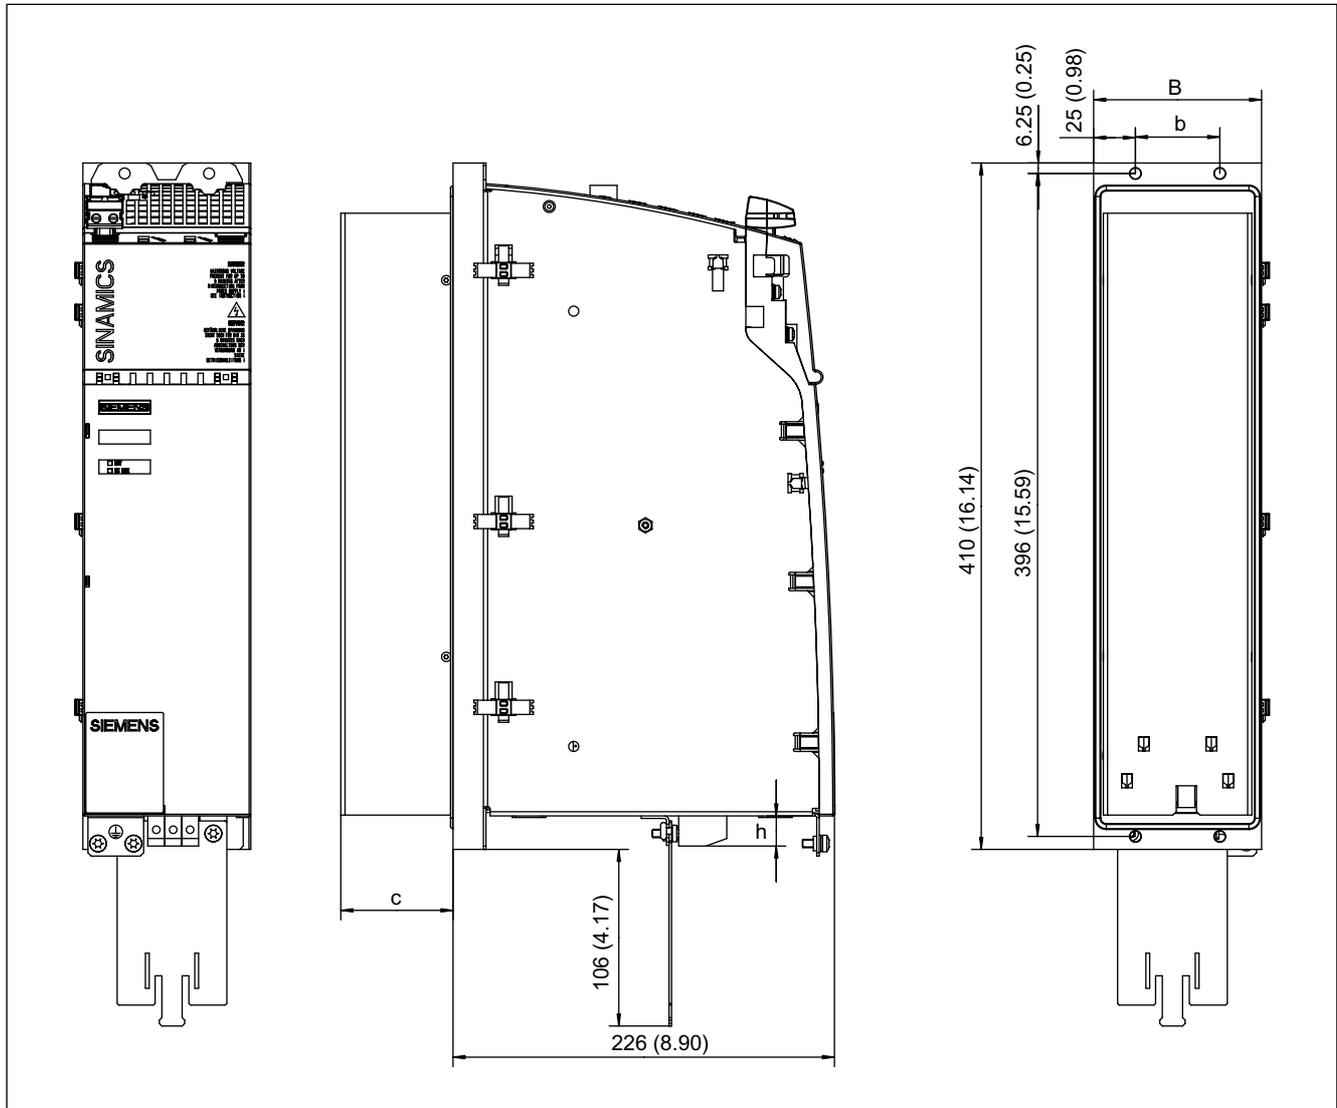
Dimension drawing of Active Line Module 16 kW with external air cooling, all data in mm and (inches)
